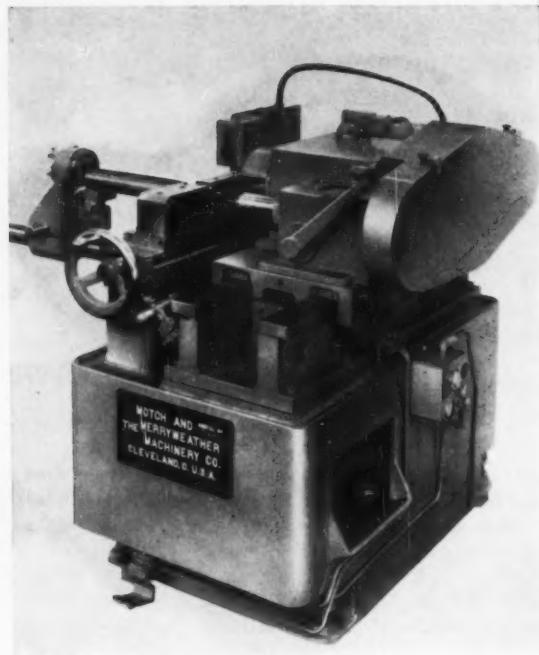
Milling and centering machine introduced by Motch & Merryweather
